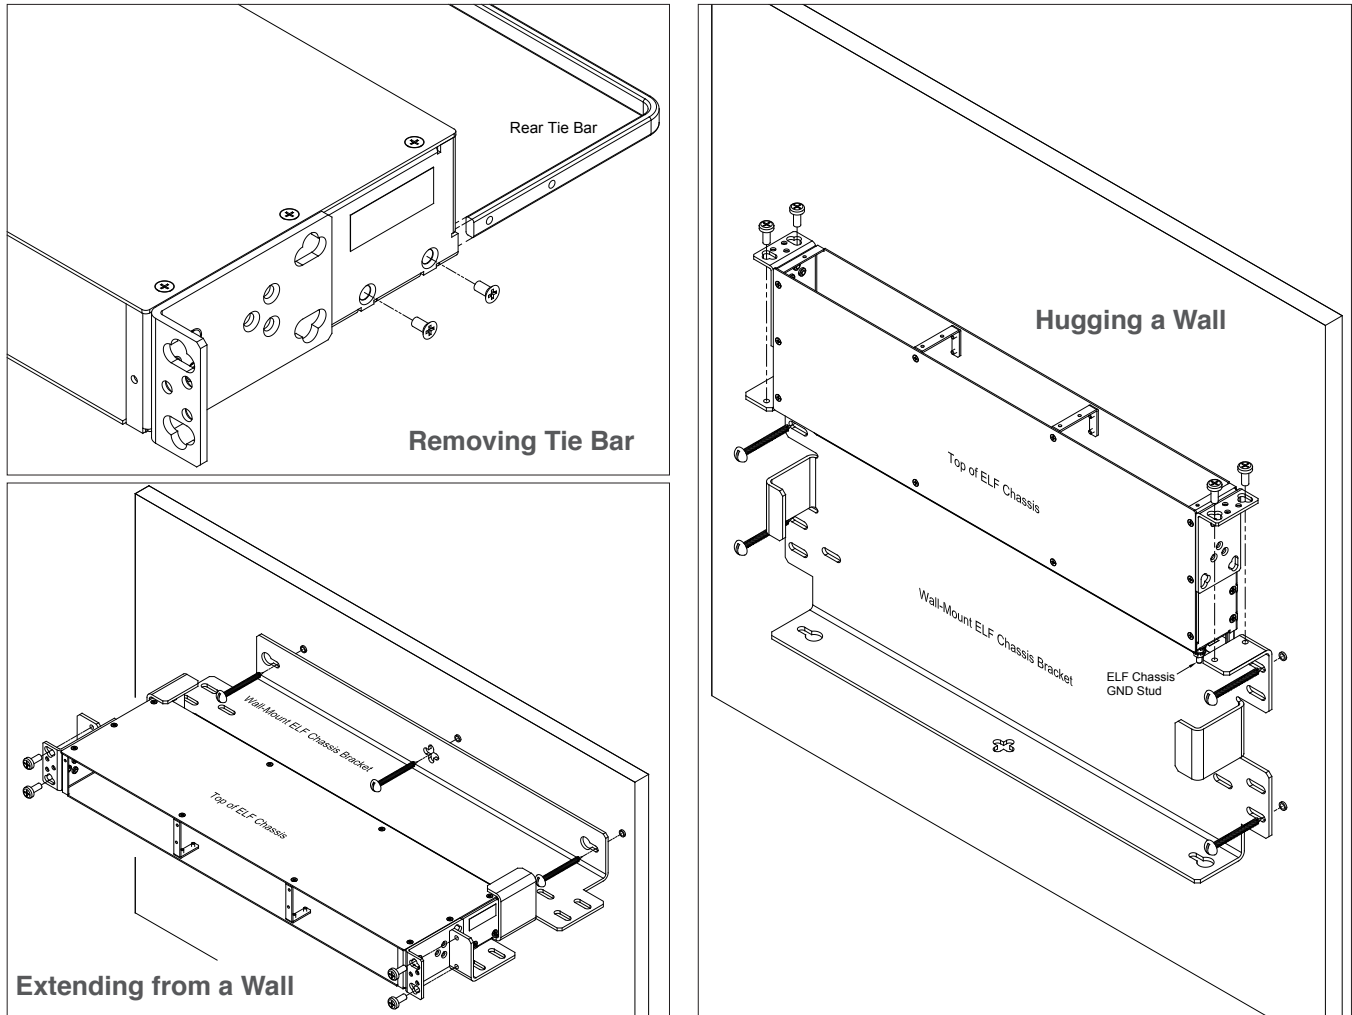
Wall-Mount ELF Chassis Bracket Installation
